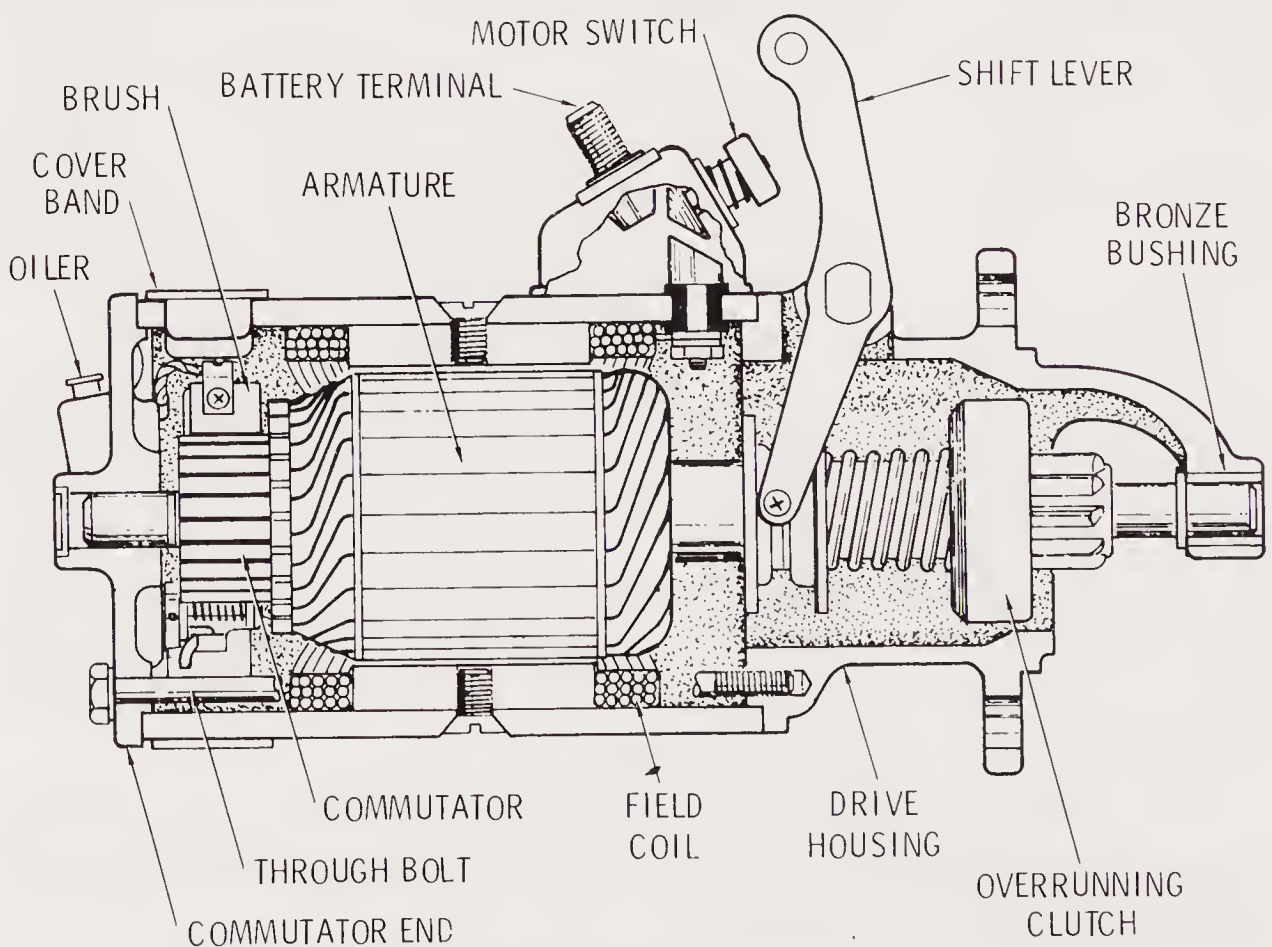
Sectional view of starting motor with overrunning clutch drive.
